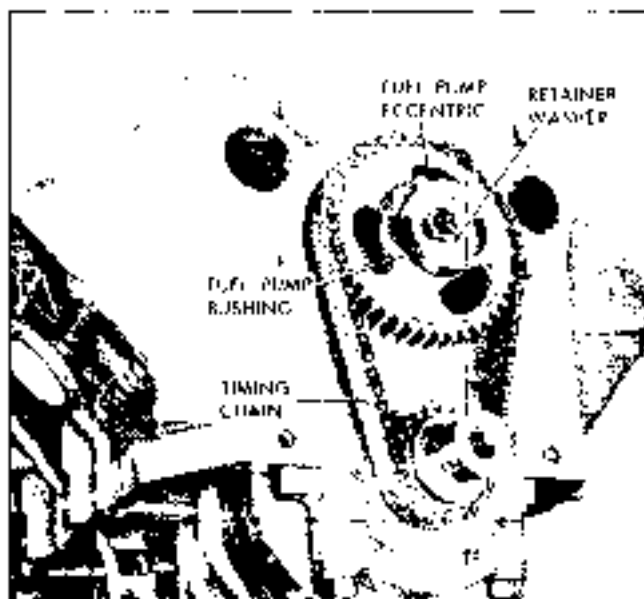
Front of Engine with Timing Chain Cover Removed
